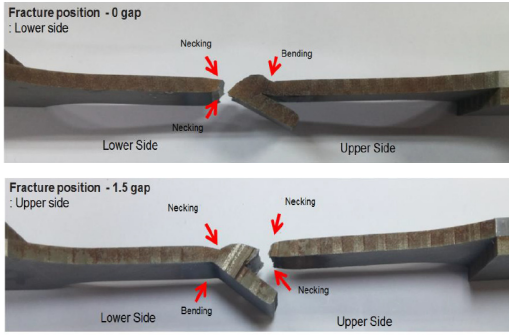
Specimen after test ; (top) 0 mm overlap weld specimen, (bottom) 1.5 mm root gap specimen
